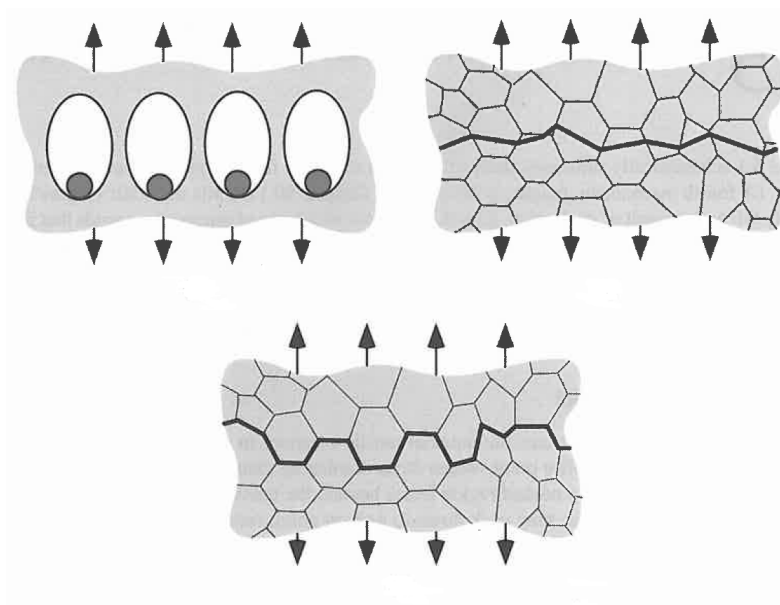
Three of the most common fracture mechanisms in metals and alloys. Upper left: ductile fracture, Upper right: cleavage, lower: intergranular fracture [2].
